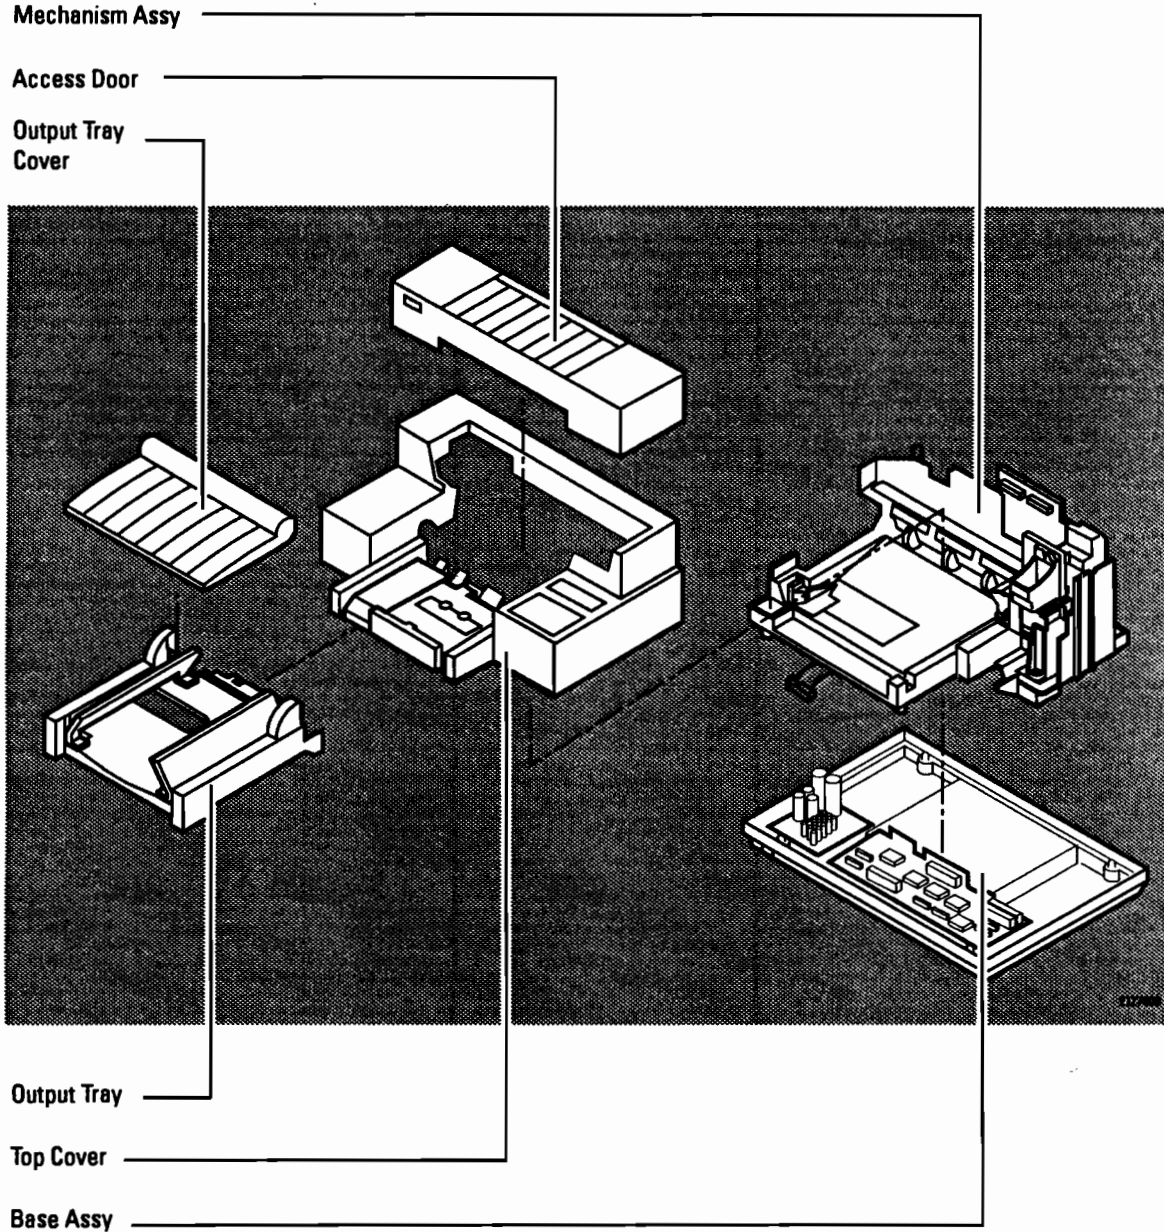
Major Component Assemblies of the Mercury/Thunder Printers
